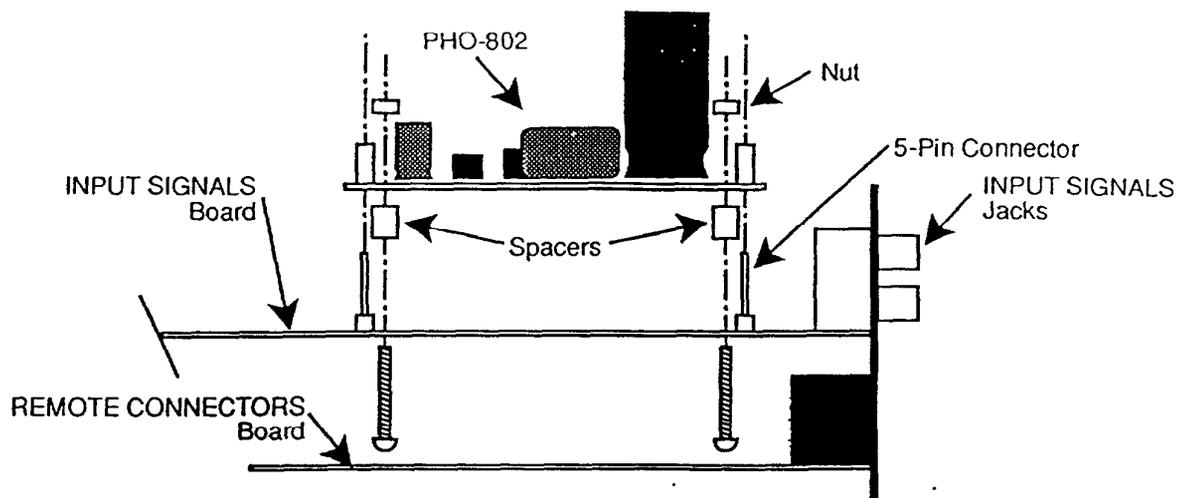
Placement of Optional PHO-802 Phono Preamp Board on INPUT SIGNALS/REMOTE CONNECTORS Assembly
